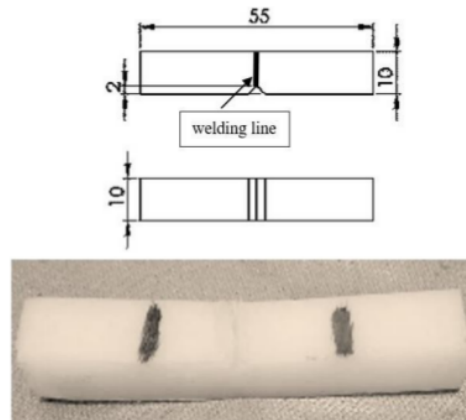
Dimension and photo of impact test specimen (dimension in mm)
